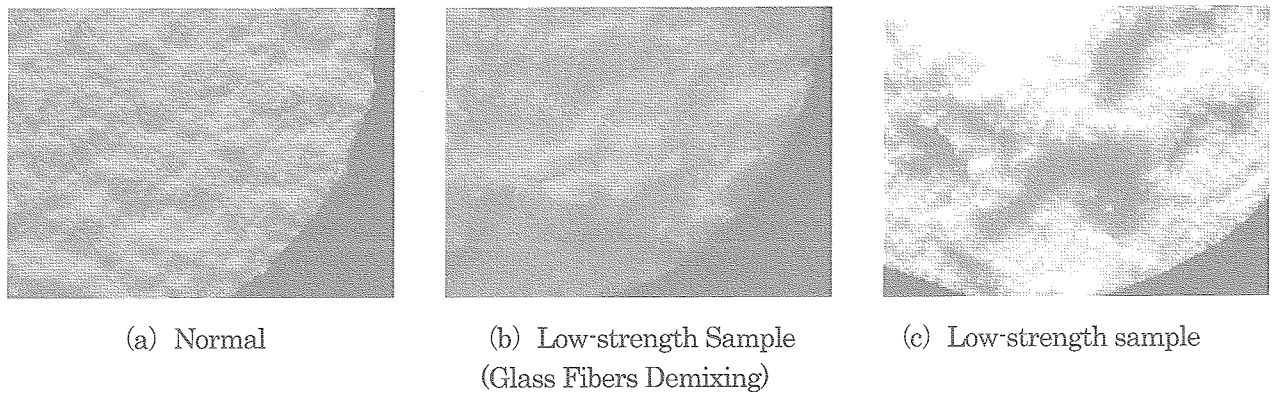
Fracture Surfaces of Insulator Cohesion Failure
